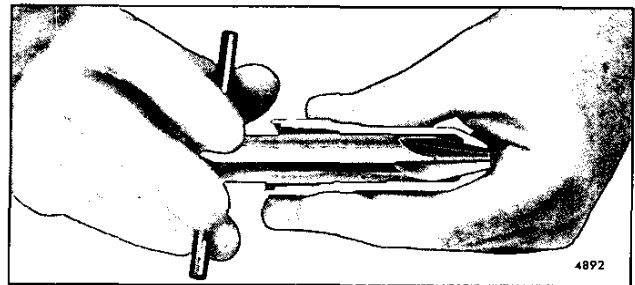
Cleaning Injector Nut Lower End with Tool J 9418-5
